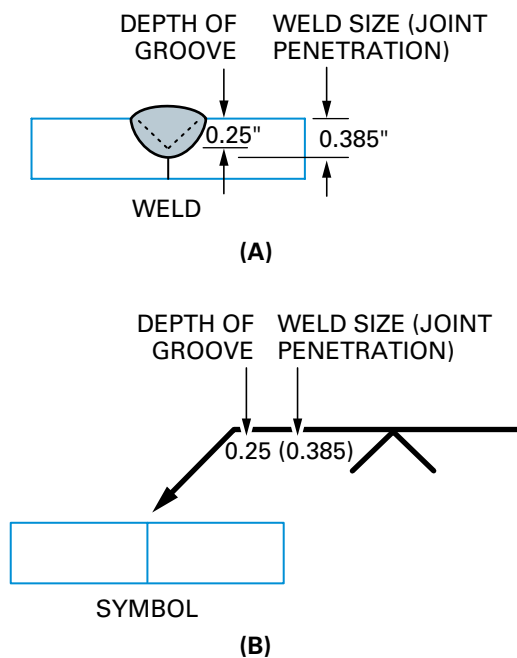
Sizing partial joint preparation (PJP) welds.
